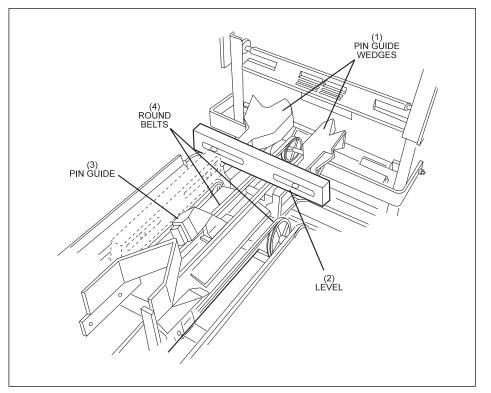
Shark Switch Leveling Adjustment - Side to Side.
